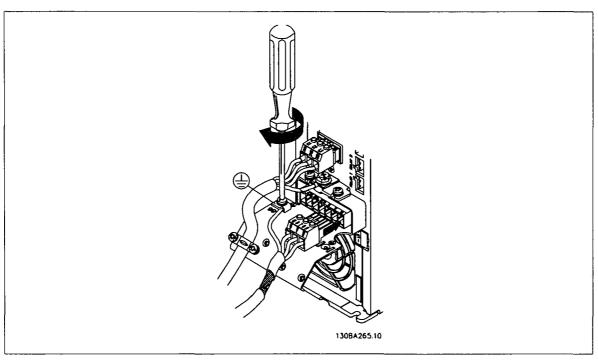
First terminate the motor earth, then place motor U, V and W wires in plug and tighten.
